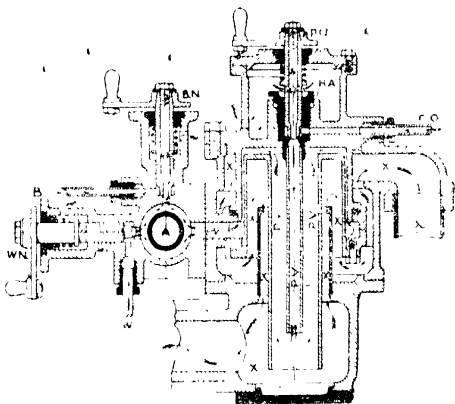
A — Butler exhaust heated vaporiser for self starting petrol-paraffin engines of over 16 b.h.p., shown fitted with petrol- and water-feed regulators direct to the inspirator.
